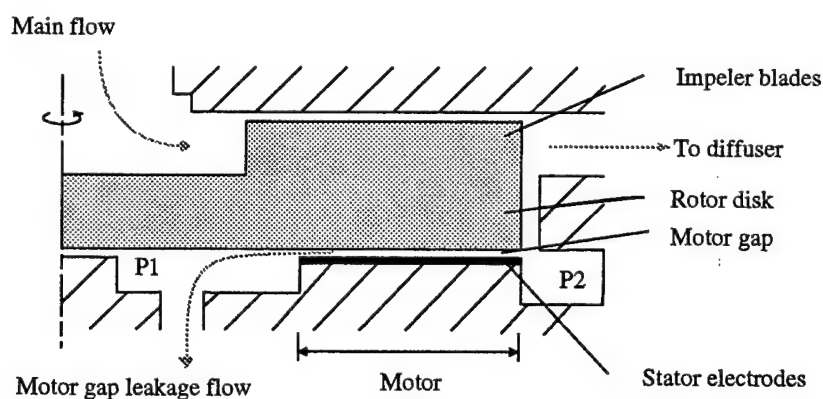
Cross-section of the motor-compressor. The main flow comes in axially, flows through the impeller and then through the diffuser (not shown). A secondary flow leaks through the motor gap, from the outer radius of the motor gap (P2) to the inner radius (P1).
